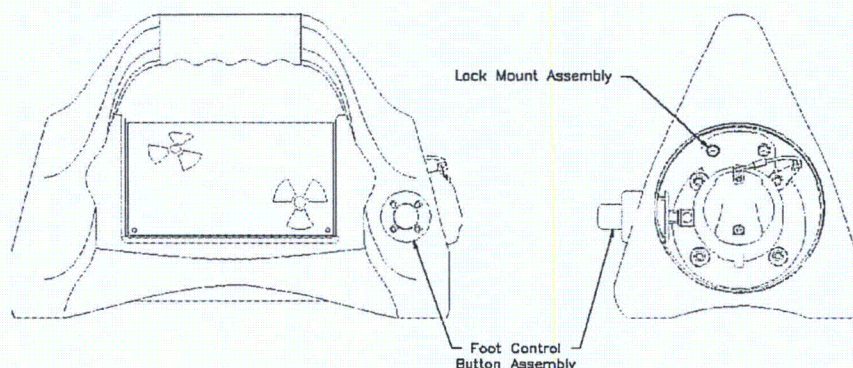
MODEL 880 (Test Unit #21) WITH FOOT BUTTON AND LOCK MOUNT ASSEMBLIES
